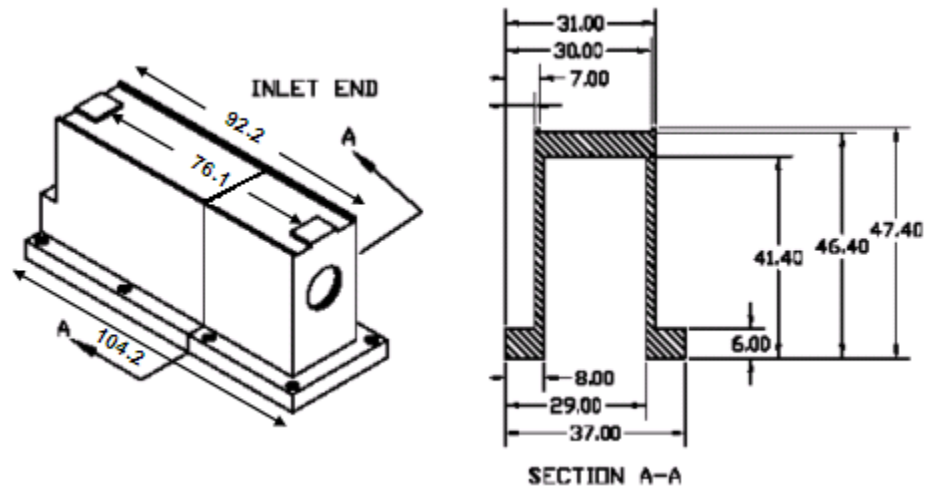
Schematic (left) and cross-sectional view (right) of outer shell
